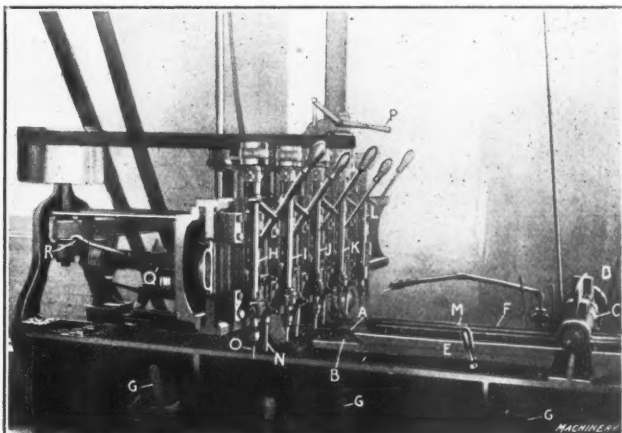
Inletting for the Barrel, Receiver, Magazine and Spring Clips
